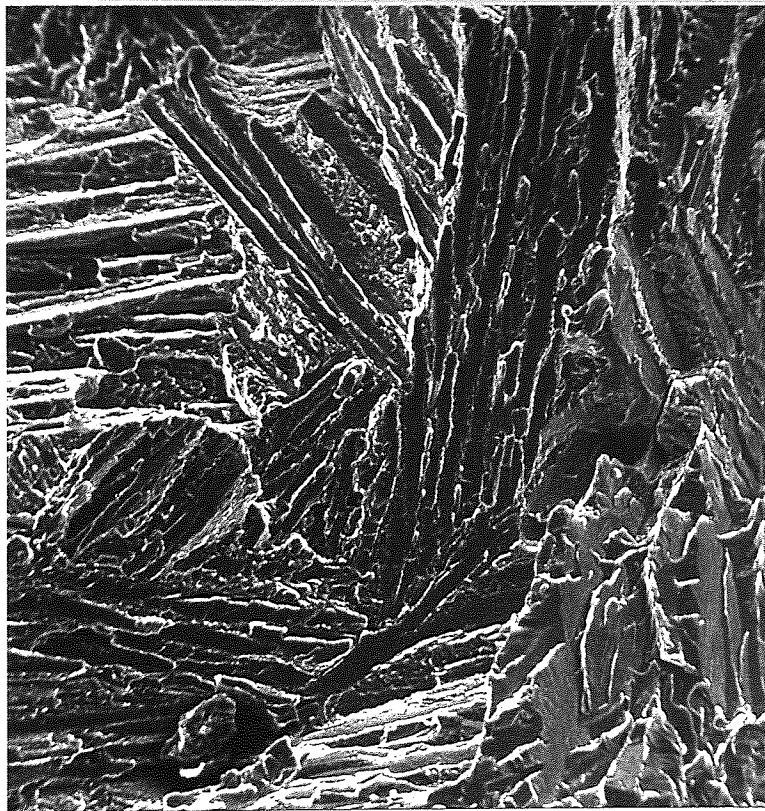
(a) FRACTURE SURFACE FROM SPECIMEN FORGED AT 950°C
